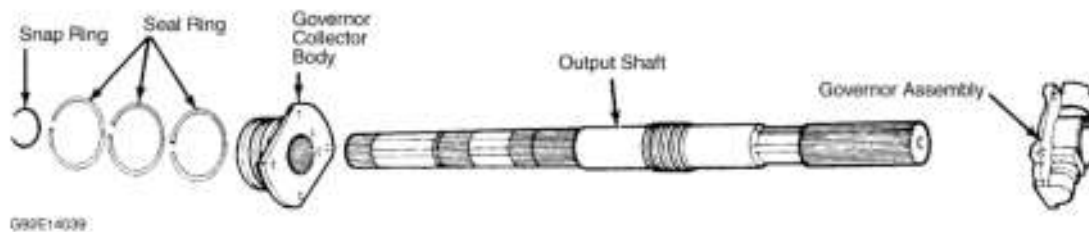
Exploded View Of Output Shaft & Governor Assembly
